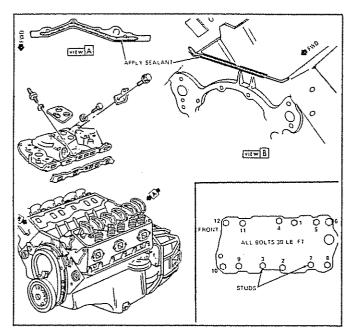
A2-8-Intake Manifold Torque Sequence - V-6
